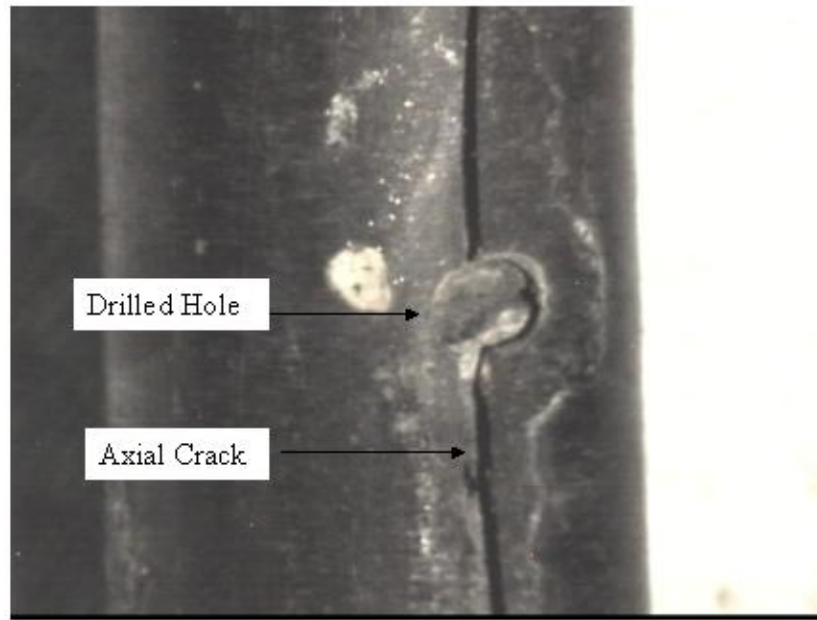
Picture of Fuel Rod Sample Showing Axial Crack Passing Through the Drilled Hole in the Cladding
